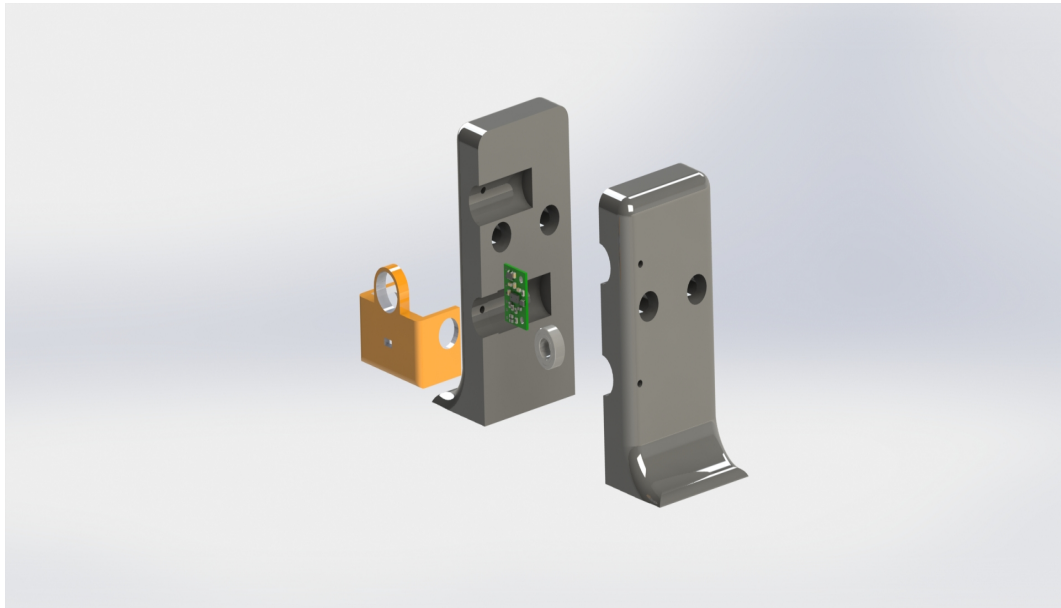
Exploded view of time-of-flight sensor, housing, and mount
